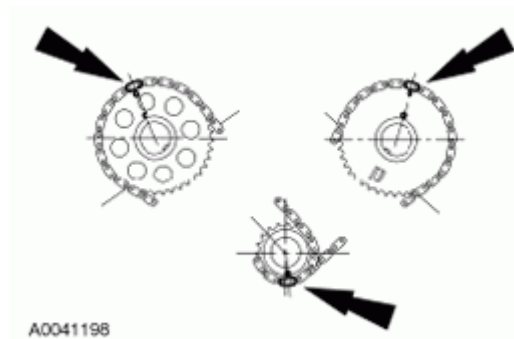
Identifying Colored (Marked) Chain Links Are Lined Up With The Dots On Crankshaft Sprocket And Camshaft Sprockets
